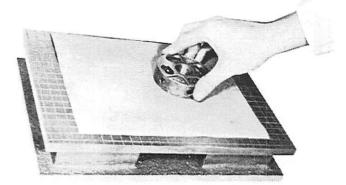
Lapping Surface of Valve-Type Center Main Bearing
